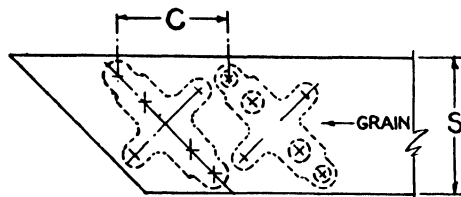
This single-row scrap-strip design for the blank shown in Fig. 18 is very wasteful of material.
